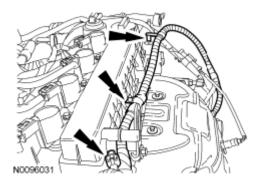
Locating Wiring Harness Retainers Courtesy of FORD MOTOR CO.
